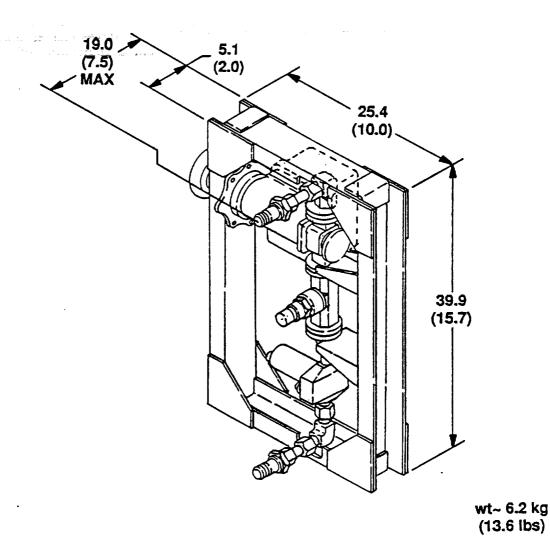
CORE RACK COOLANT RETURN VALVE ASSEMBLY
